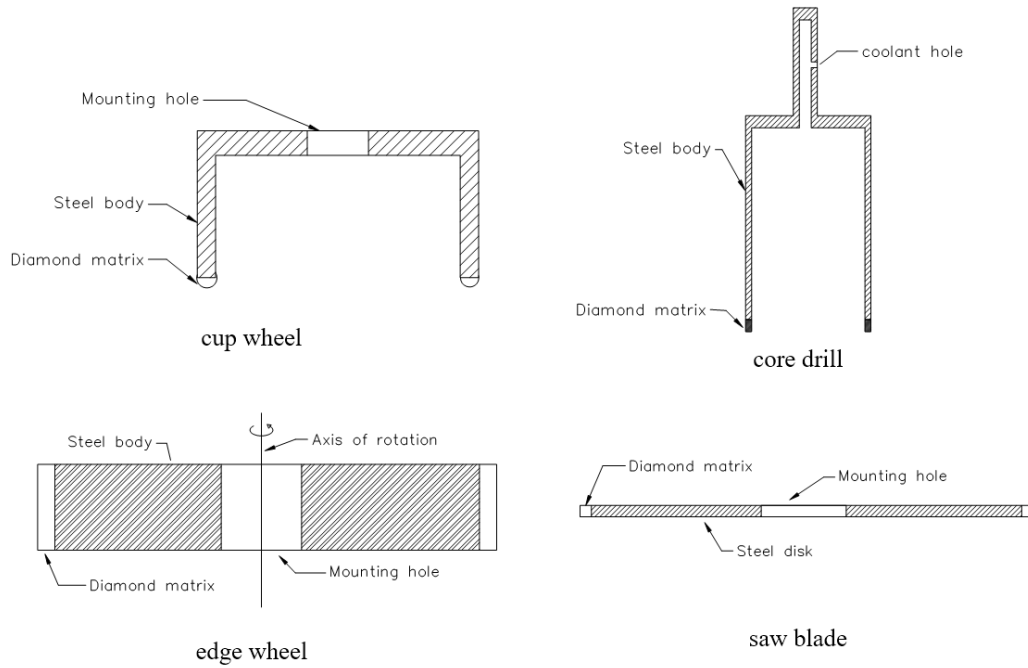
Diamond grinding wheels. There are two types of grinding tool used for processing functional surfaces: cup wheels and core drills are commonly used to generate curvatures and drill holes on the surface of the workpiece, while the peripheral wheels, with diamonds on their edges, are used for edging and sawing.^[30]
